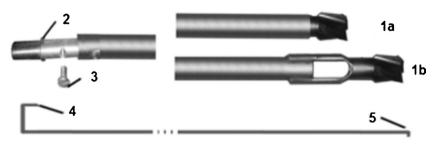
(1–5) Schematic illustration of the borer and extractor components: 1a and b modifications of the tenon plug cutter, 2 adapter, 3 locking bolt, 4 handlebar, 5 cutting blade.
